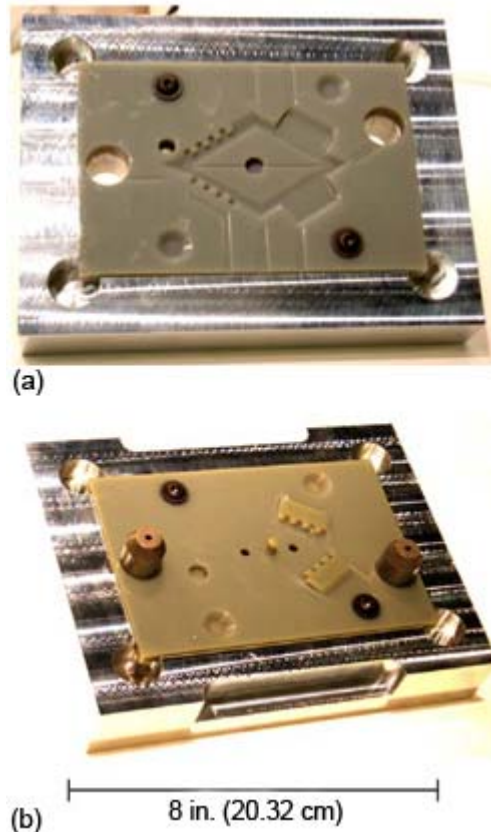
Mold top with cavity insert (a), mold bottom with core insert and locating pins (b).
